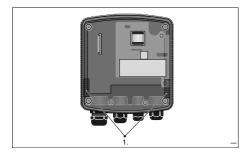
Fitting the profile seal on the lower part of the controller housing
